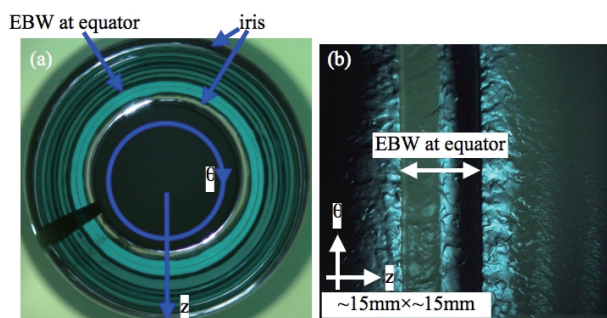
(a) Picture of a cavity's inner surface taken with omnidirectional camera. (b) Local picture of a part of electron beam welding (EBW) on the cavity's inner surface at its equator region.
